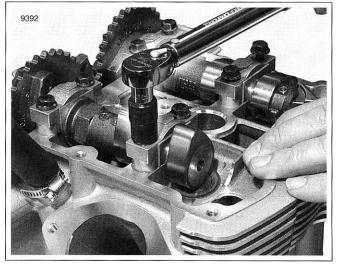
Cam Journal Caps @ 9.7 Nm (85 in-lbs)
